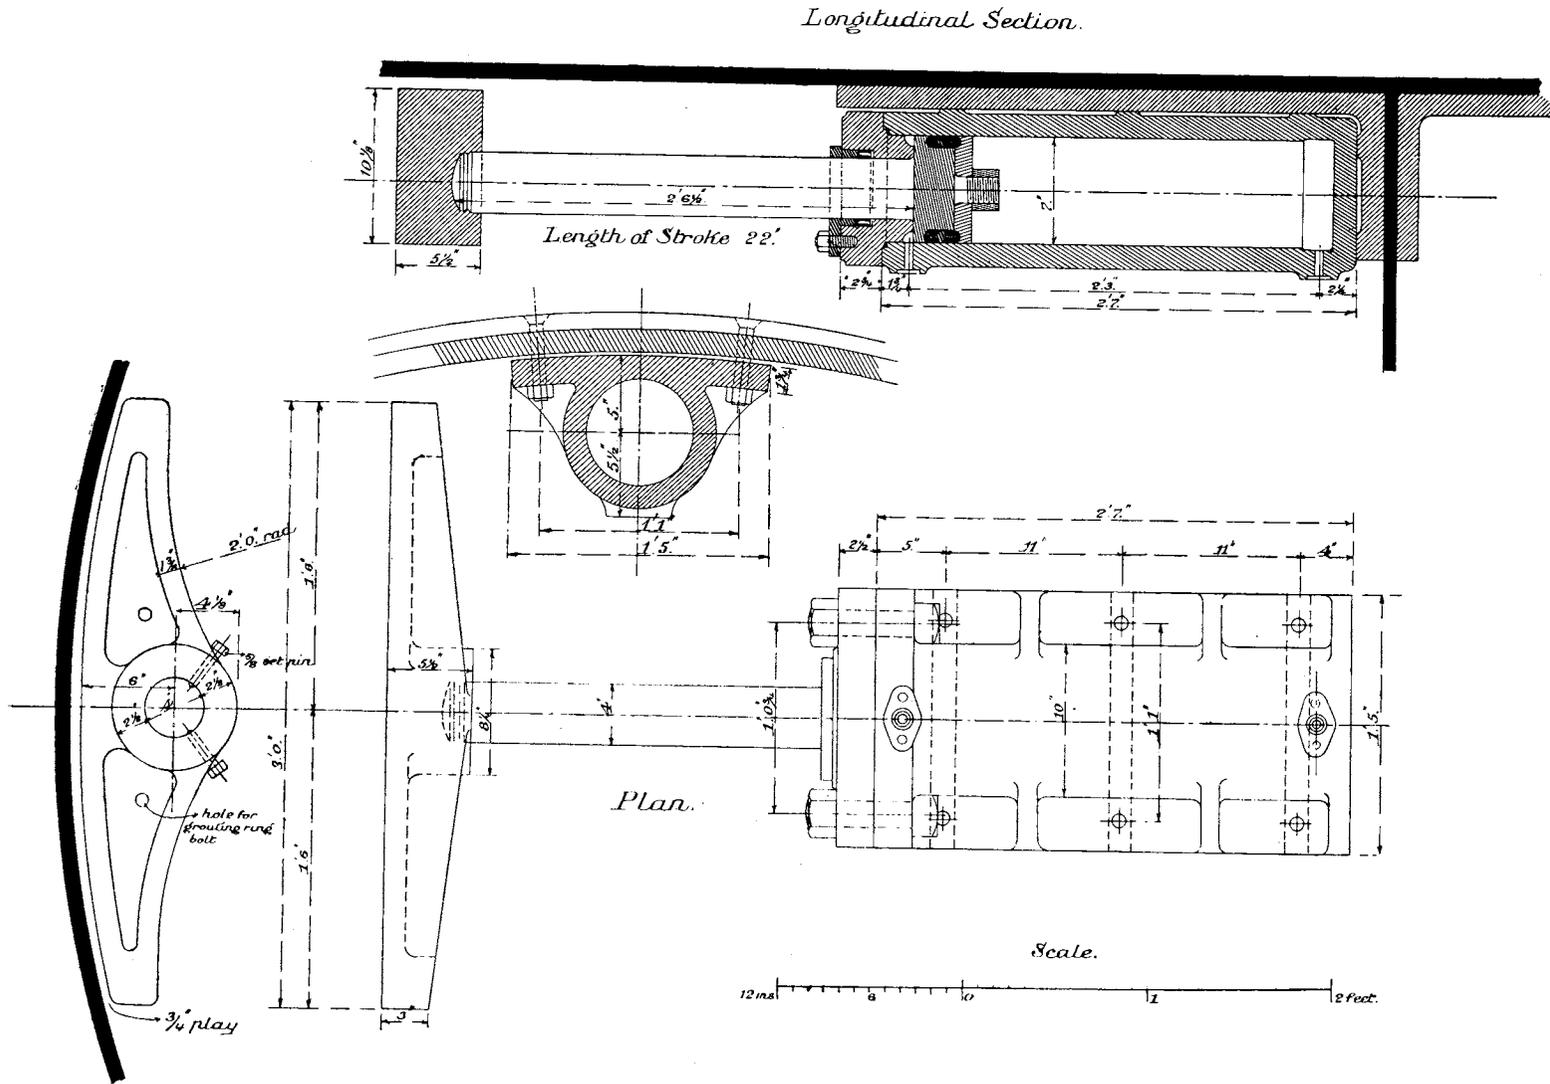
GREENWICH TUNNEL, LONDON. The Shield: Details of Hydraulic Rams.
